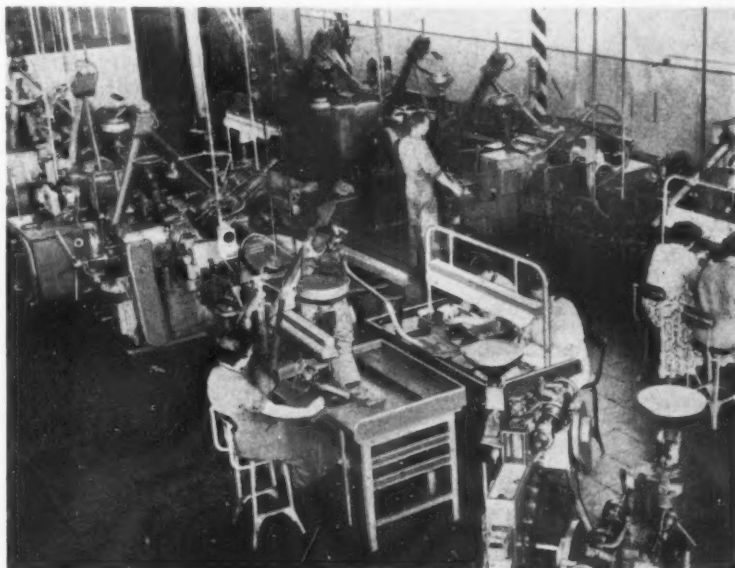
General View of the Roller-finishing Section of the N.B. Plant. There are Two Parallel Lines Comprising Centreless Grinding, and Spherical-end Grinding Machines, Connected by Rotating-spiral Conveyors
